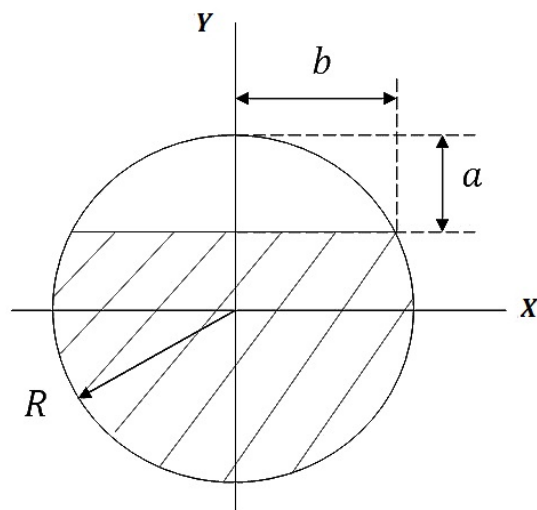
Cross-section of a gapping fatigue crack
